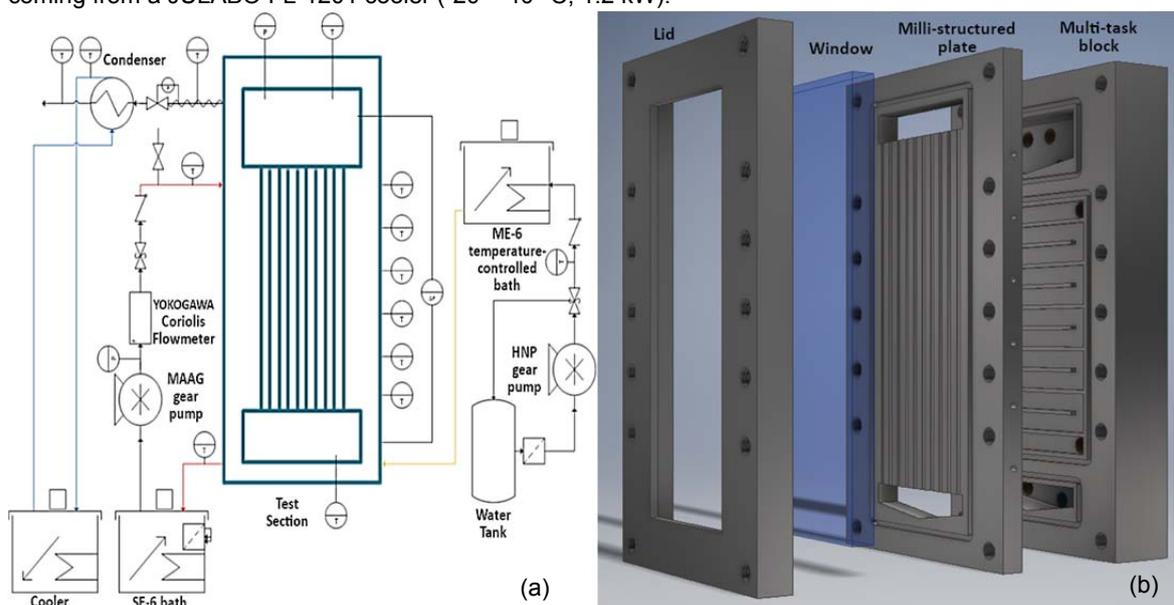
PI&D of the test bench (a), exploded view of the test section (b)
